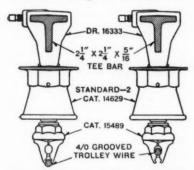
End views of trolley supporting and insulating devices used on several stripping operations
